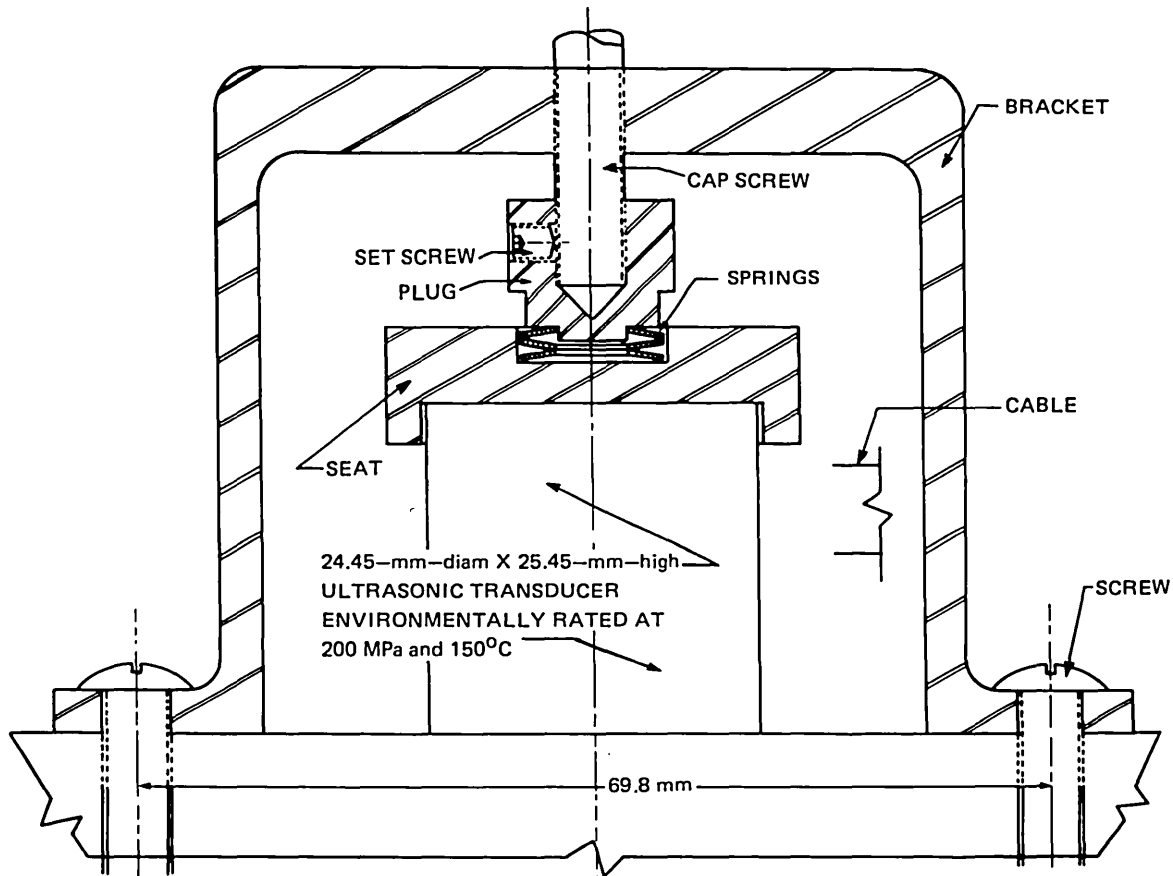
Assembly for holding ultrasonic transducer in vessel V-8A.
